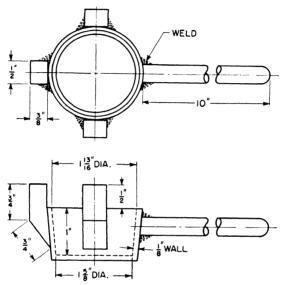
Dimensions of steel mold used to obtain samples of metal from the casting machines and furnaces.
